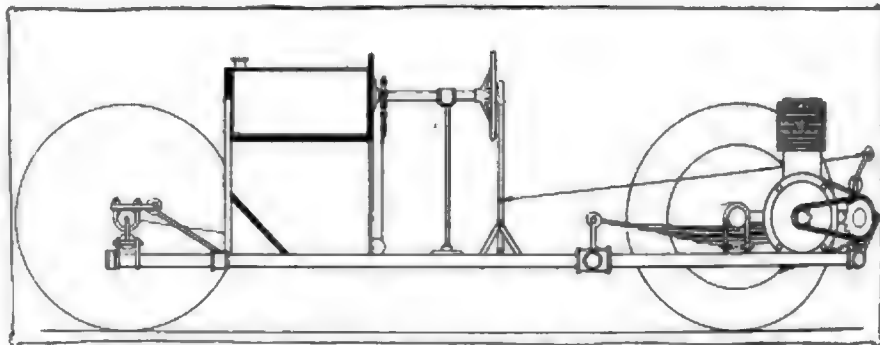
SIDE SECTIONAL ELEVATION OF PIPE-FRAME CHASSIS
